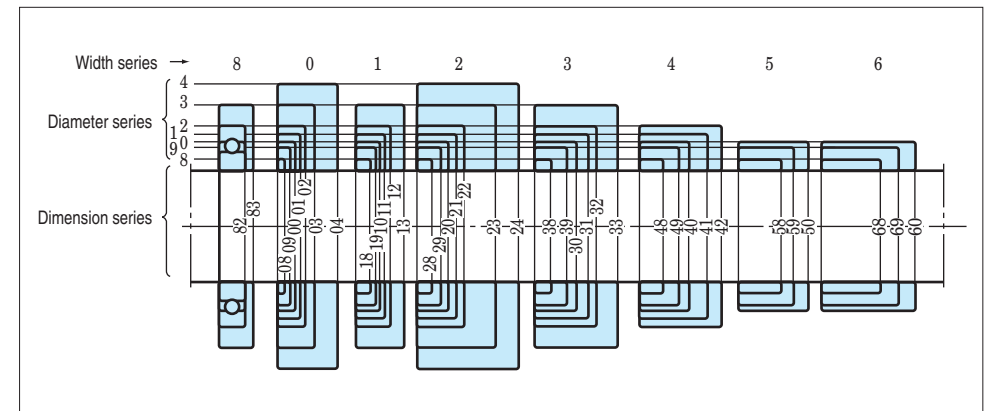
Radial bearing dimension series diagram (diameter series 7 omitted)
